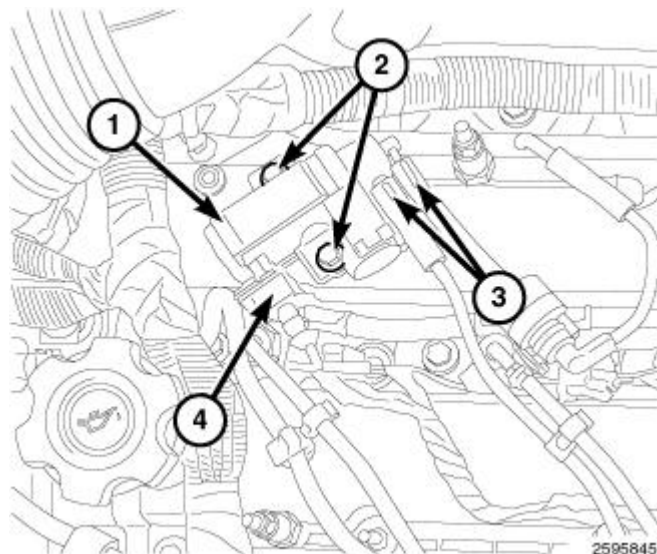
EGR Vacuum Solenoid Vacuum Lines & Harness Connector
